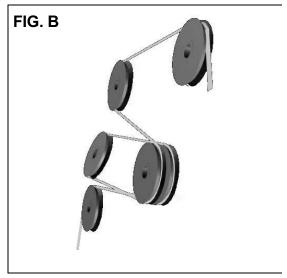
This completes the assembly of the MSL-IV. It is recommended that you check and secure all the hardware assemblies and inspect all cable routing for proper tension and assembly.
